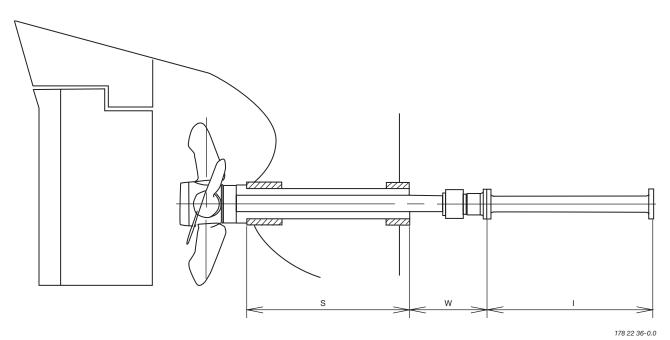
Dimension sketch for propeller design purposes
